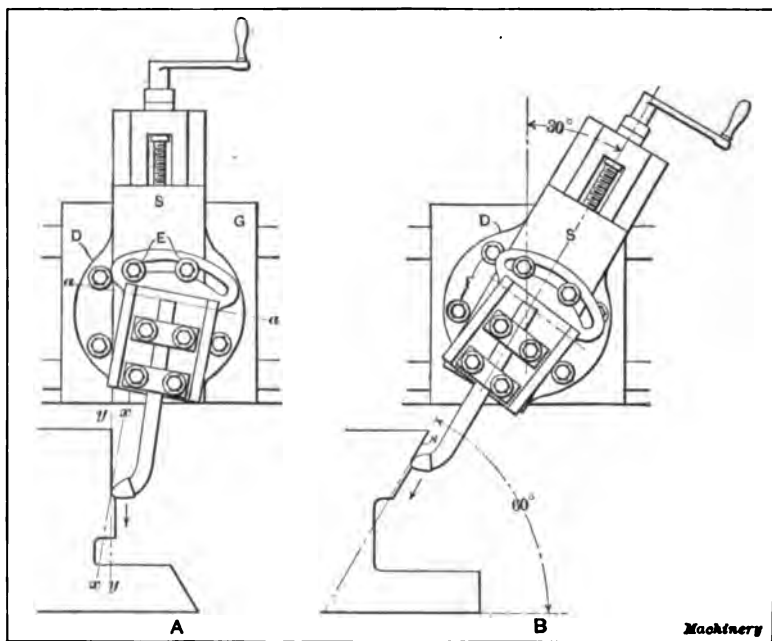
Positions of Tool and Head for Planing Vertical and Angular Surfaces
